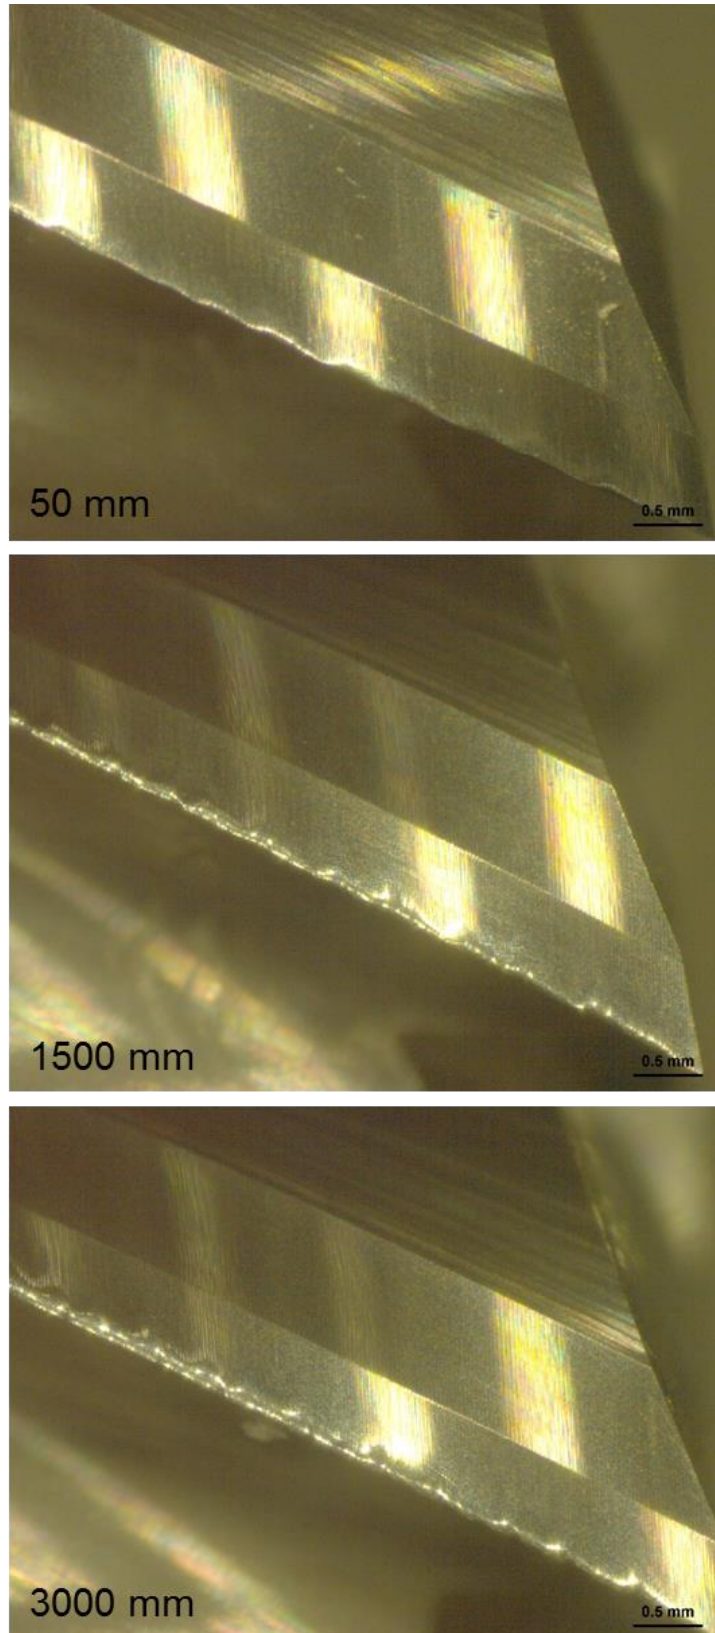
Microscopy images of tungsten carbide end mill used in UAM CCF.
